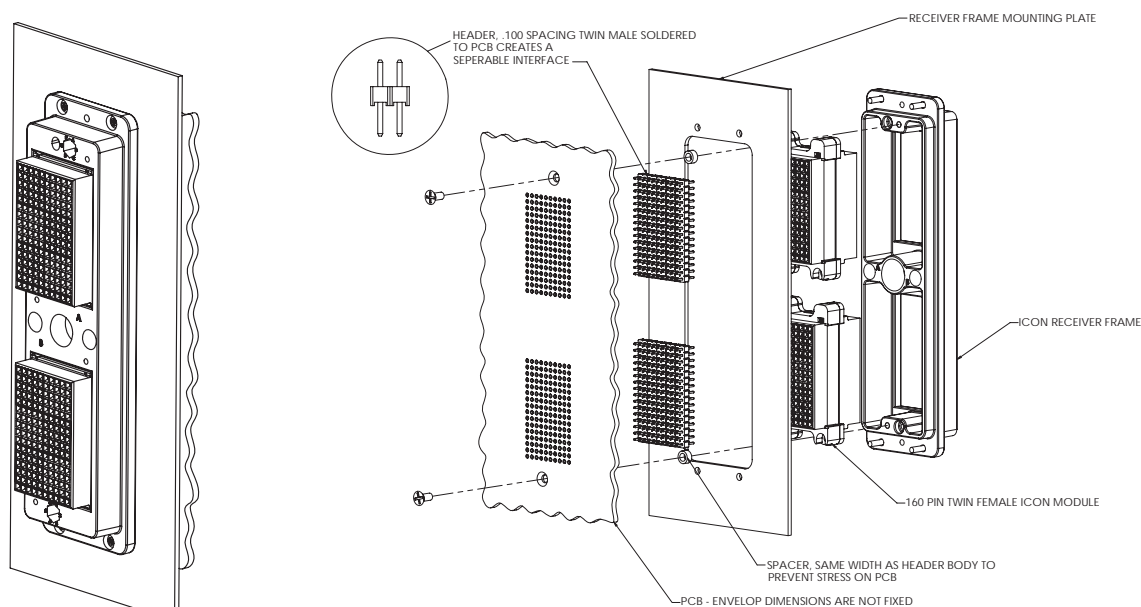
Figure A. iCon Receiver with two 160 pin QuadraPaddle modules. Each module is loaded with twin female contacts, Part # 610 138 100. Each module has twin male headers connecting the female contacts to the PCB plated thru holes.
